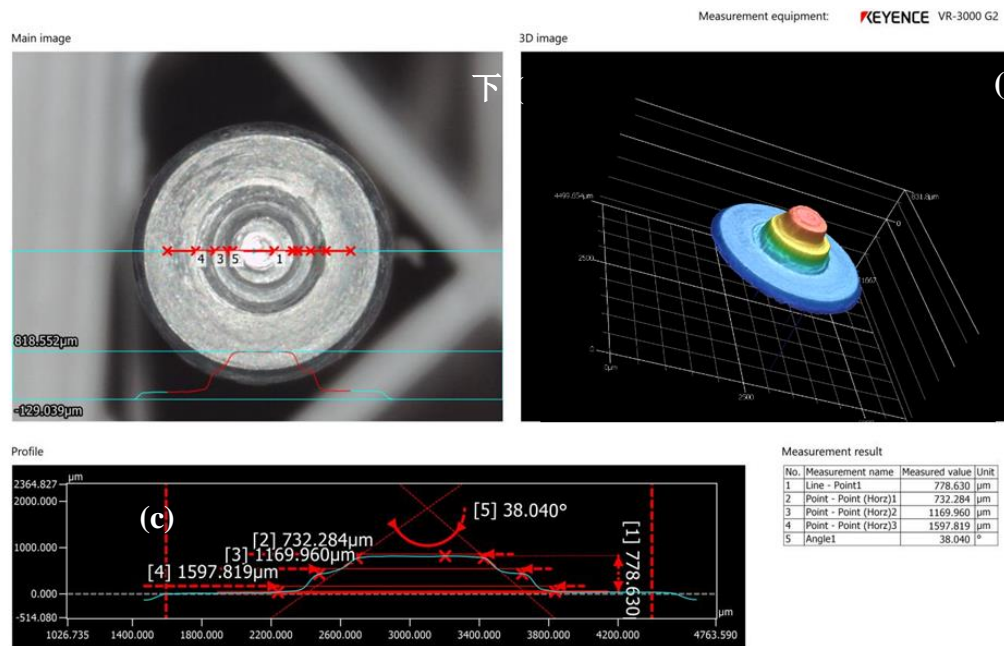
Inspected μ FSW joining tool: (a) top view of the tool pin surface; (b) tool pin surface profile; (c) tool pin profile with extracted geometric features
